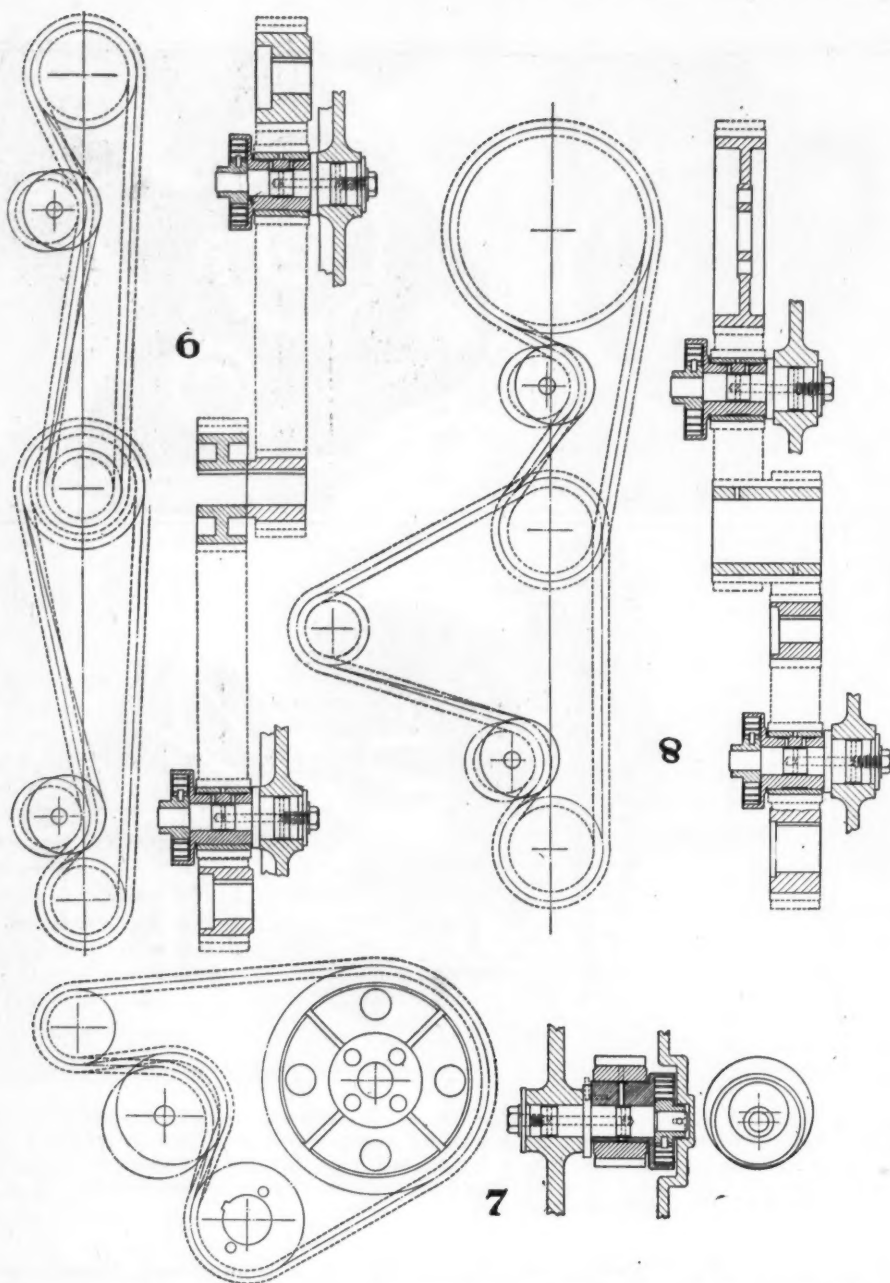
On the Frontenac car the overhead camshaft is driven by a two-step Link-Belt chain layout employing two automatic idlers to maintain proper tension on each chain. Fig. 7—The new chain front end drive on the Haynes automobile engine employs an automatic idler take-up with a double sided chain. Fig. 8—The Link Belt chain installation on the Holmes car is a two-step employing two automatic tension idlers
